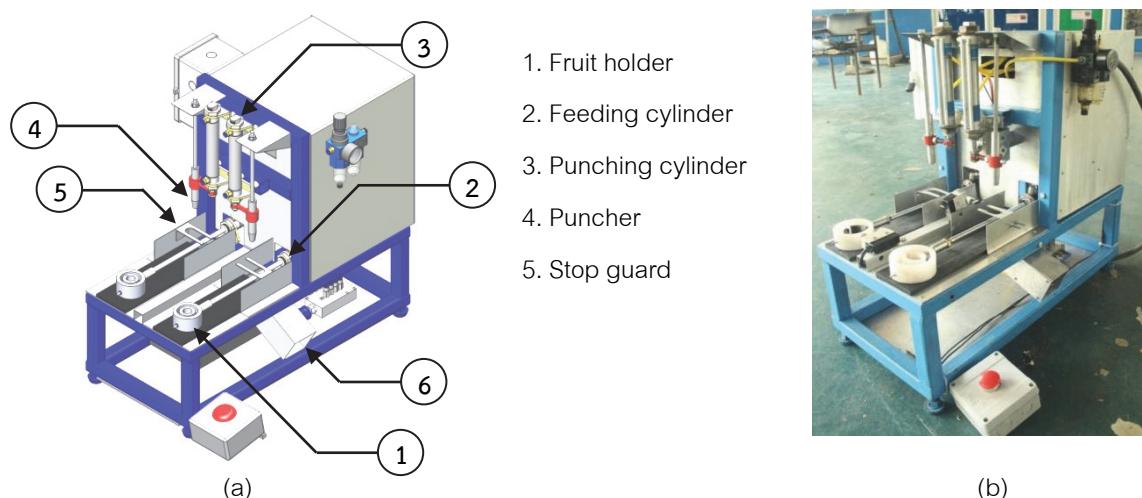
(a) Components of Longan seed removing machine (b) The prototype
